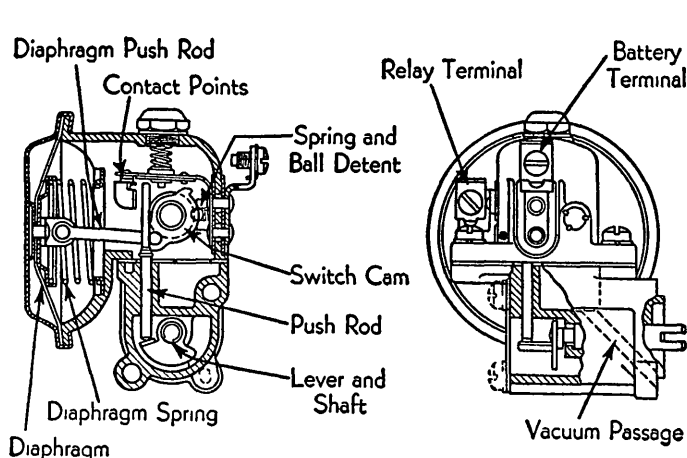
Delco-Remy carburetor mounted vacuum switch. Buick 1939
